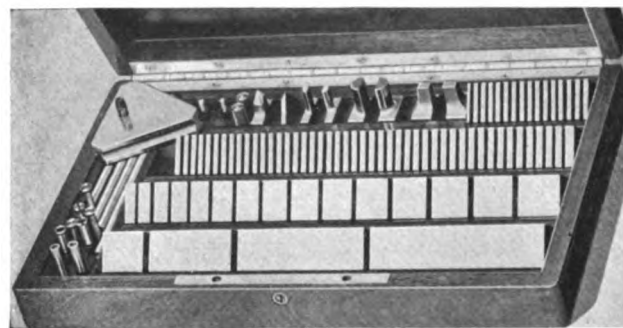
Pratt & Whitney Precision Gauge Blocks—81-Piece Set
